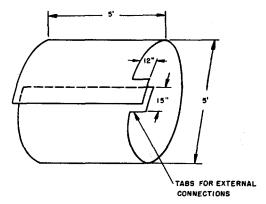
Geometry of aluminum sheet used for secondary winding.
